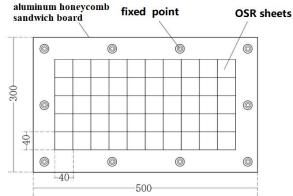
Schematic diagram of mechanical properties test piece (mm)
